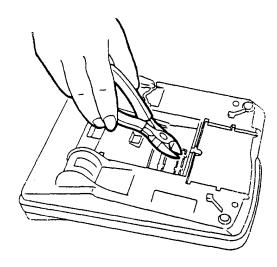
Removing the Knockouts to Install ADA (1)-W (BK) Unit or ADA (2)-W (BK) Unit
